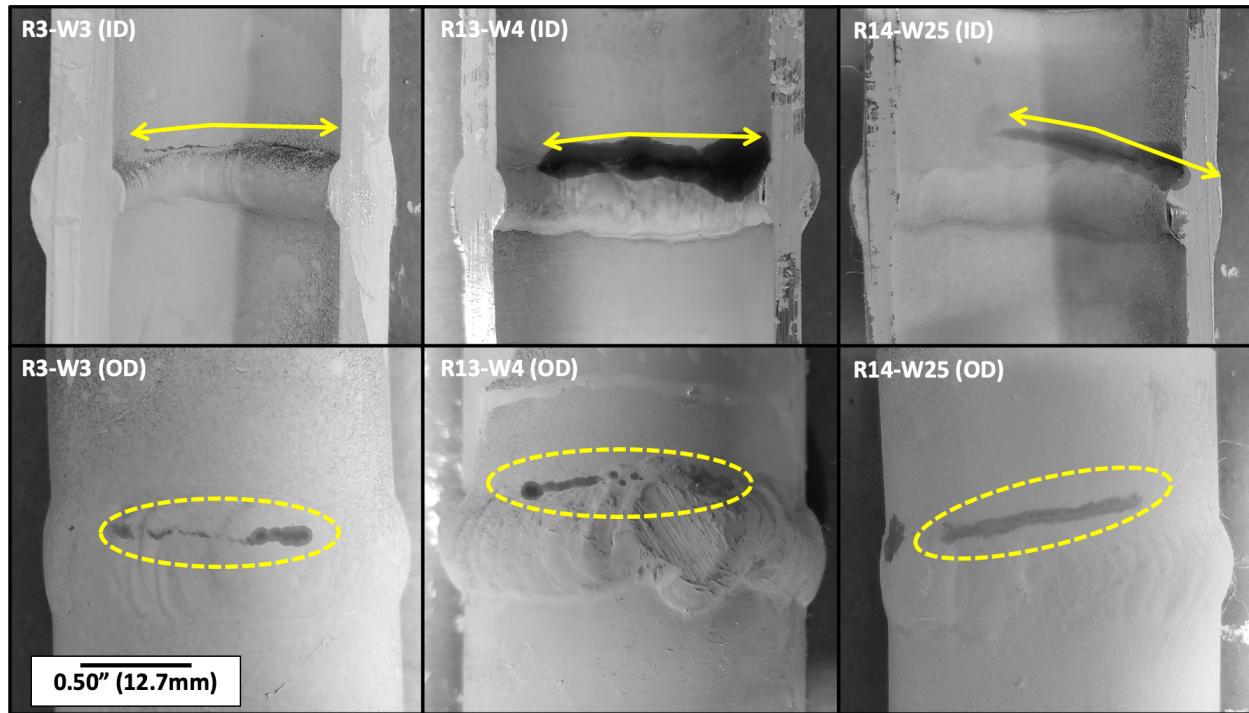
Die penetrate inspection showing ID fusion line cracking (top) and variable OD cracking (bottom) including weld metal (left), fusion line (center), and base metal (right). In all cases, cracks extended approximately 1/3 of circumference
